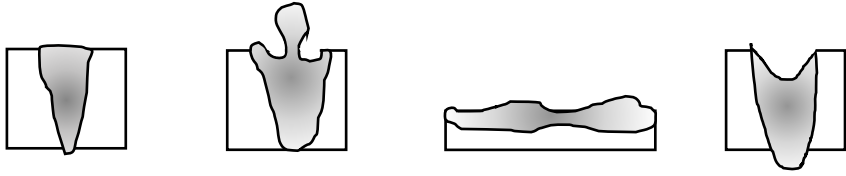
Weld shapes connected to welding velocity a) normal/good b) undercut c) humping d) dropout. Adapted from [10]
